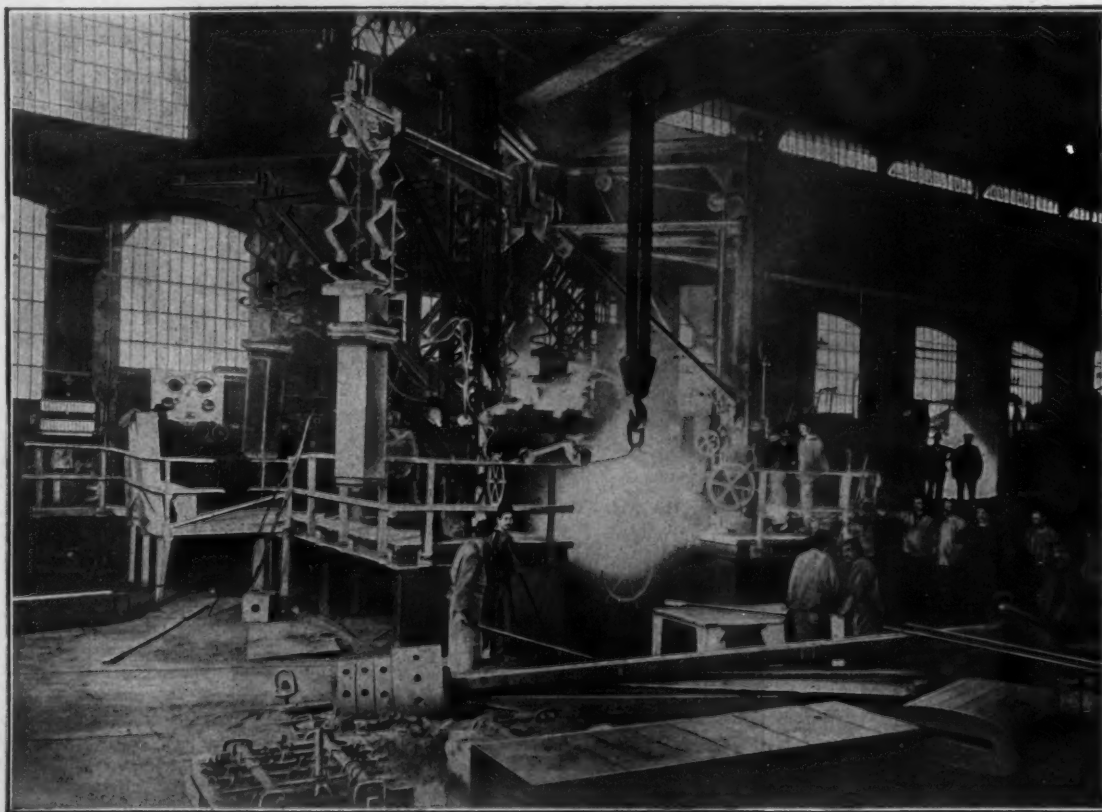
The Keller Electric Furnace at Unieux.—Removing the Roof.
